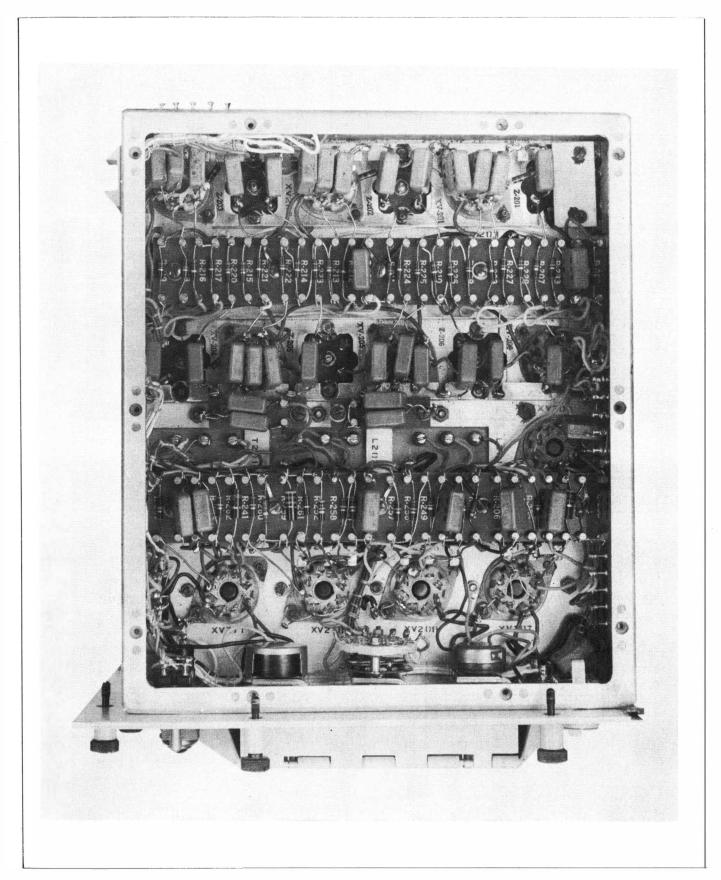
IF/AF Unit, Bottom View, Cover Plate Removed
